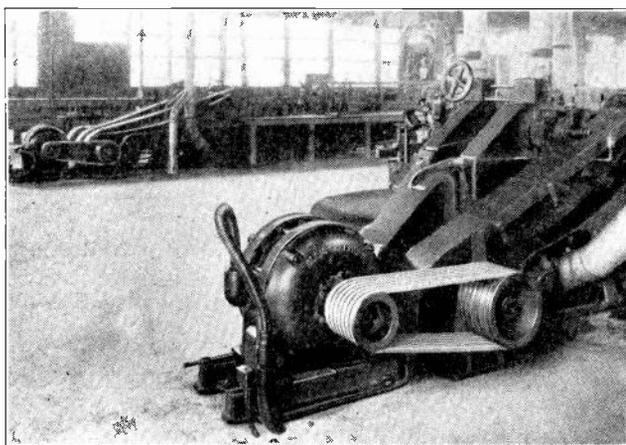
An A. C. induction motor in use for driving a woodworking machine. The motor is connected to the machine by means of a special rope drive. (Photo courtesy Allis-Chalmers Mfg. Co.)
